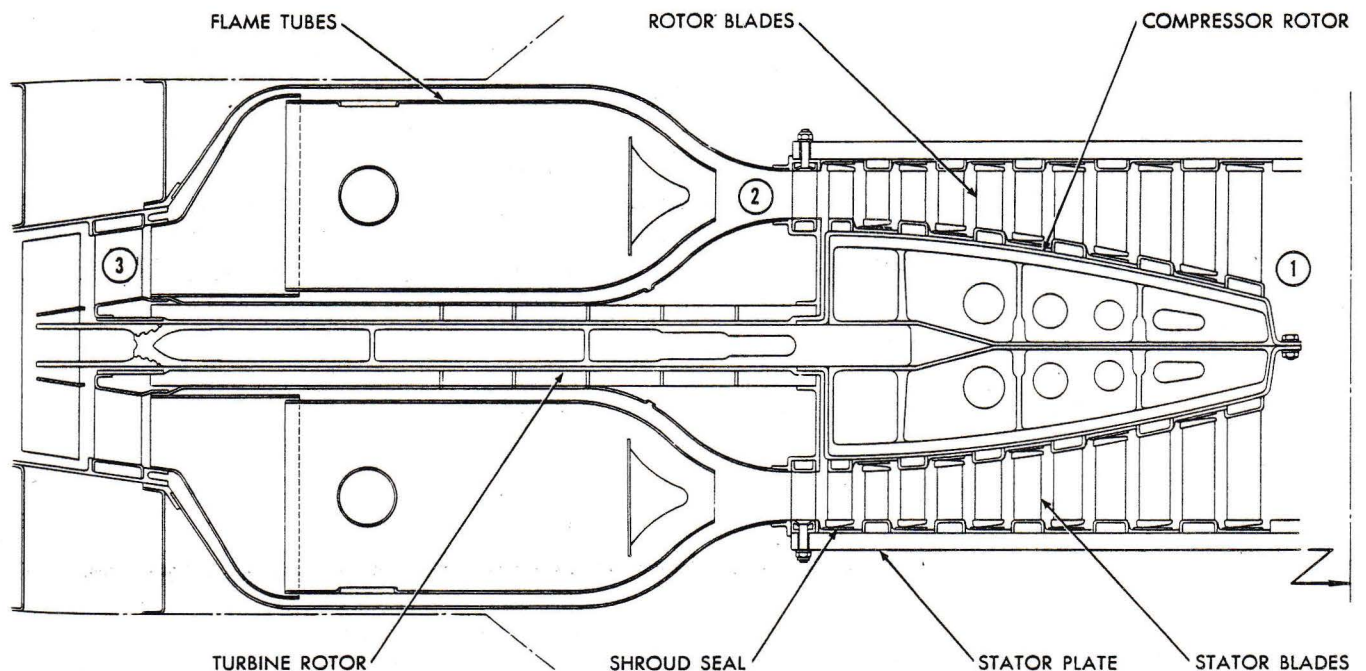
TYPICAL CROSS-SECTION THROUGH ENGINE
